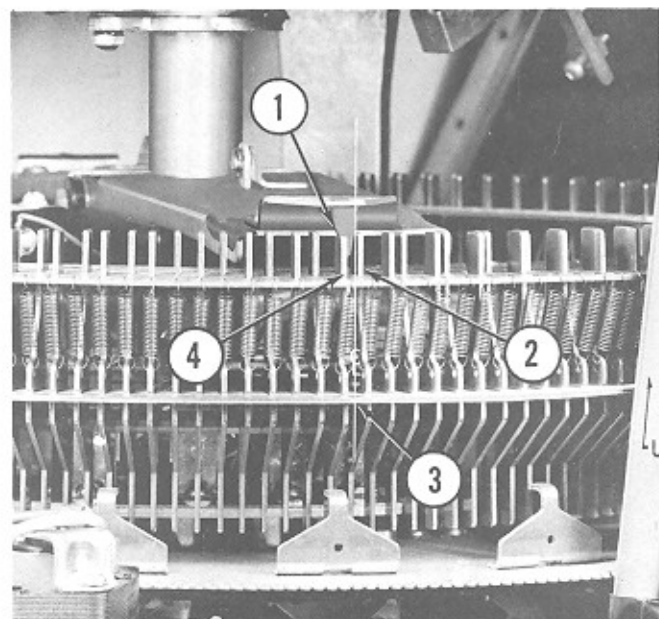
ELECTRICAL SELECTOR ADJUSTMENT - 2800
